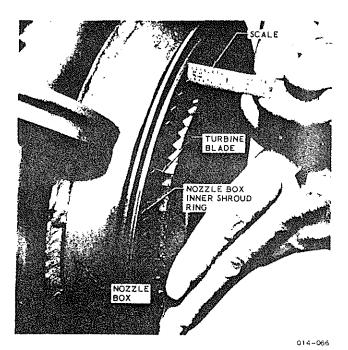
Checking Gas Producer Turbine Blade Trailing Edge to Nozzle Box Shroud Clearance
